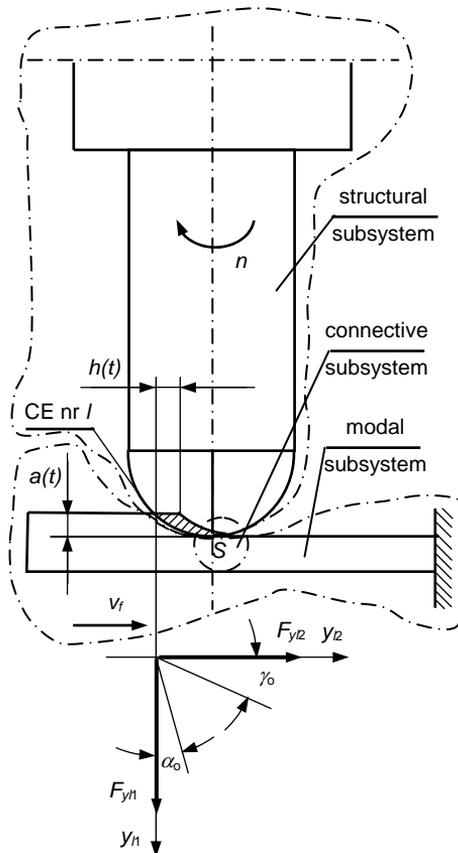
A scheme of a slender ball end milling of one-side-supported flexible plate
